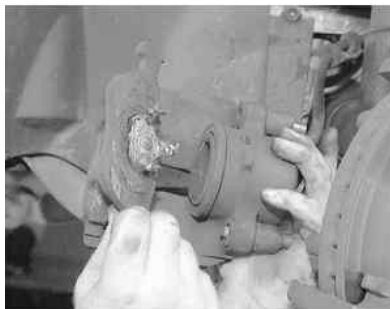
Thoroughly brush and clean the caliper carrier before replacing the pads
